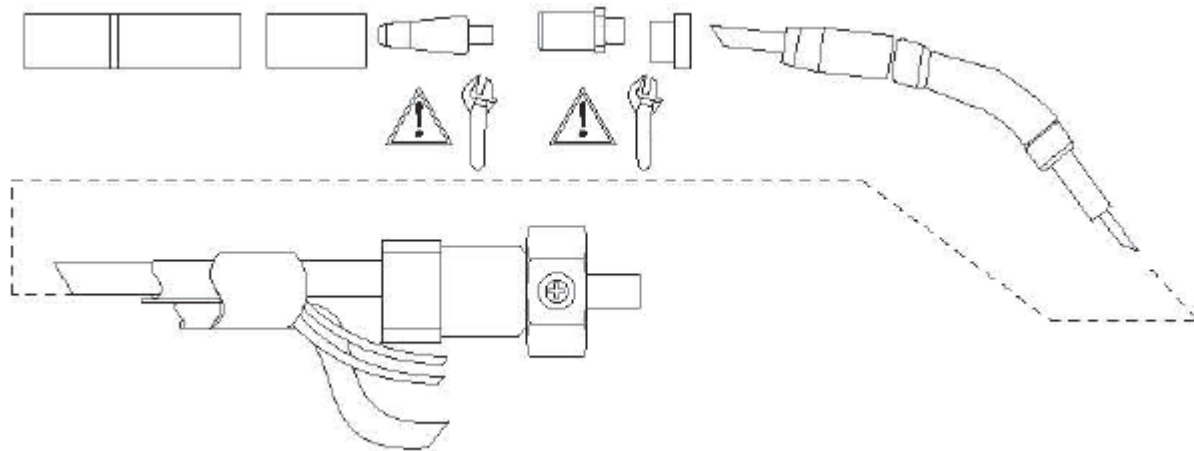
Parts of the Welding Gun and Wire Guide
